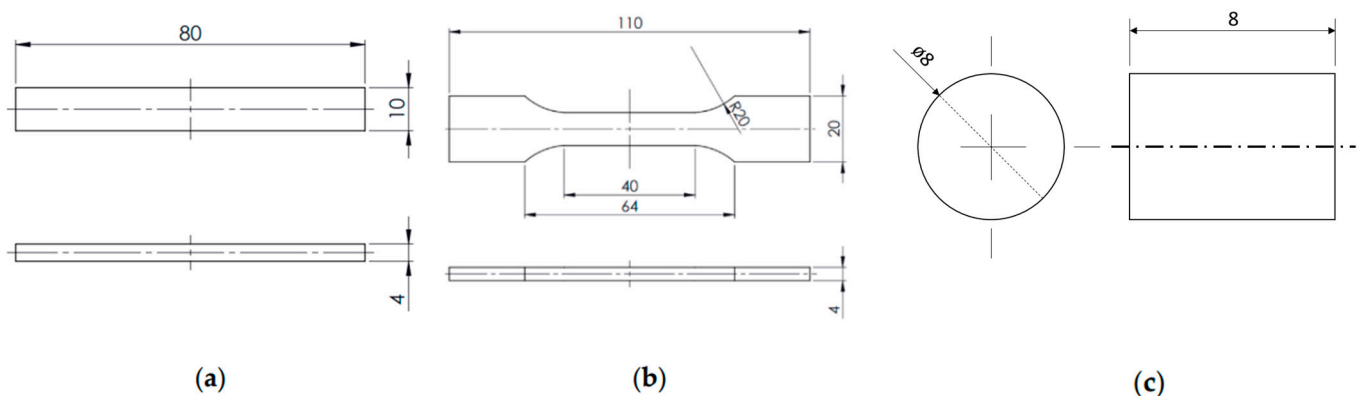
Dimensions of specimens used for mechanical ((a)—bending, (b)—tensile) and (c) tribological tests given in mm.
